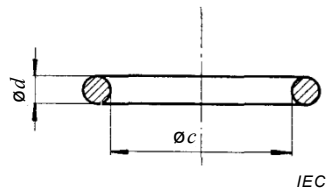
Flange type C: 60154 IEC-PCR 220-500 gasket
